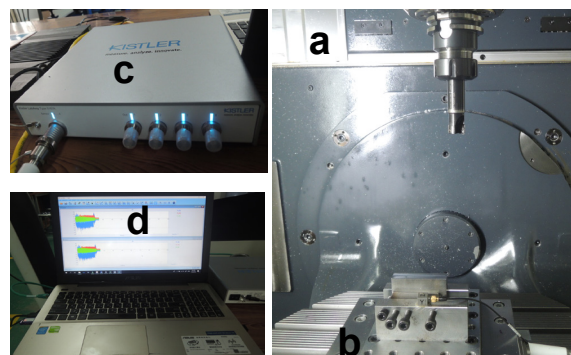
Setting of cutting force measurement; a) CNC machine, b) dynamometer, c) processing box, and d) PC and display system
